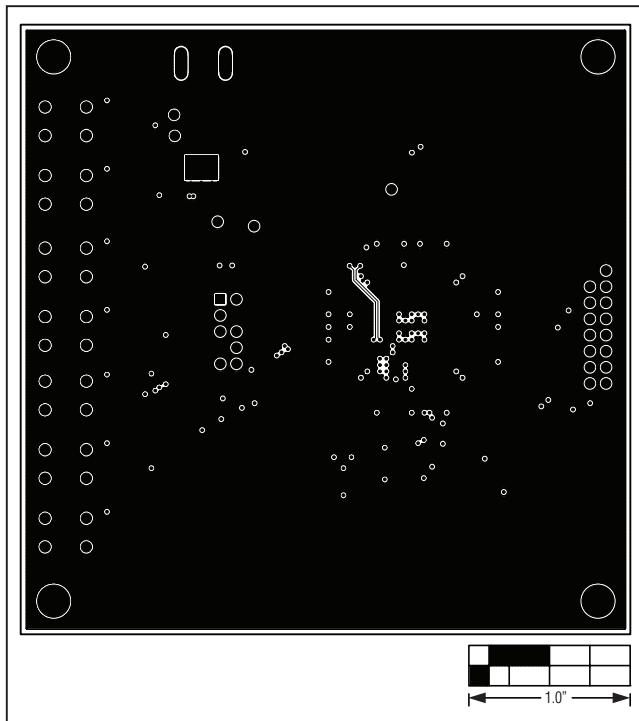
MAX4940 Master Board PCB Layout—Power Layer 3
